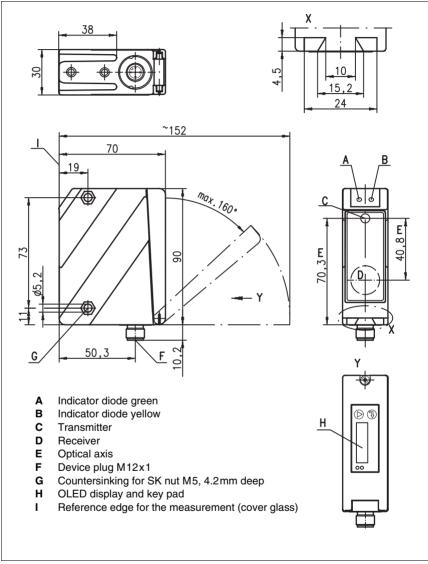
Dimensioned drawing triangulation sensors ODSL(R) 96B...
